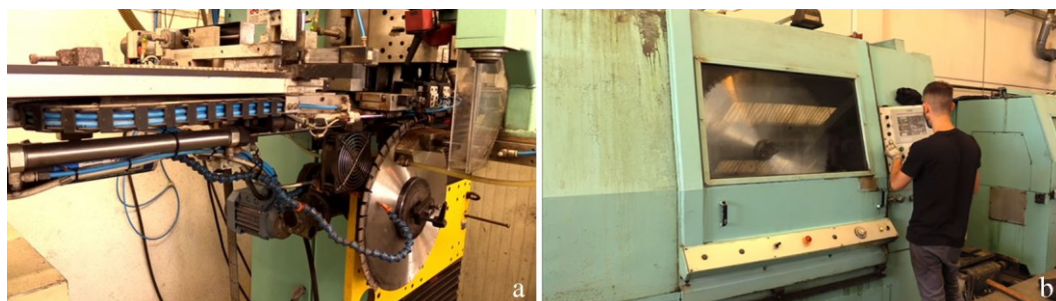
a) welding of diamond sectors on the steel core of a disk; b) grinding of the diamond disk (images from Unidiamant - <https://youtu.be/gYJsozO2YvE>)
